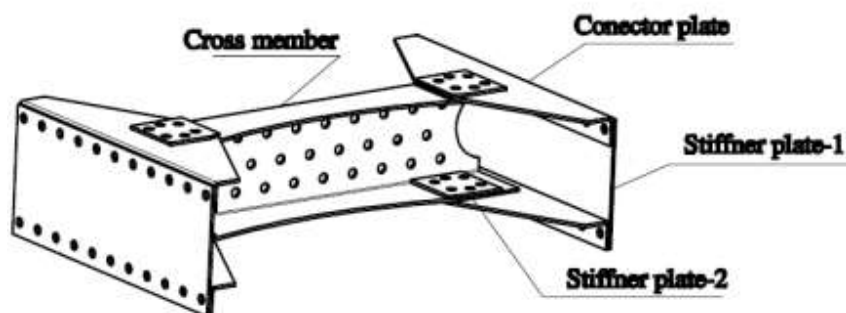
New proposed modified Cross member with stiffeners.
